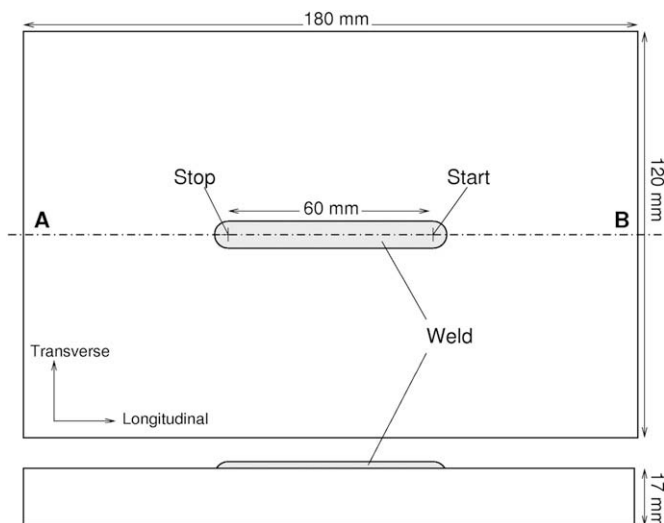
Nominal dimensions of bead-on-plate specimen.
